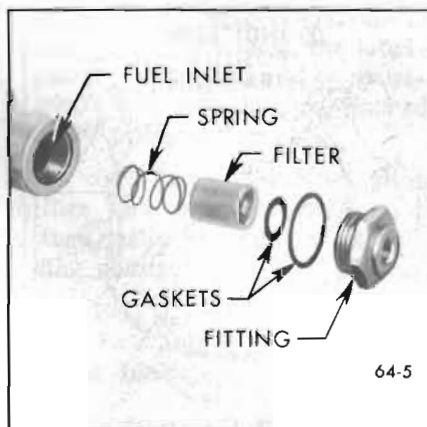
V-6 Engine Carburetor Fuel Filter
